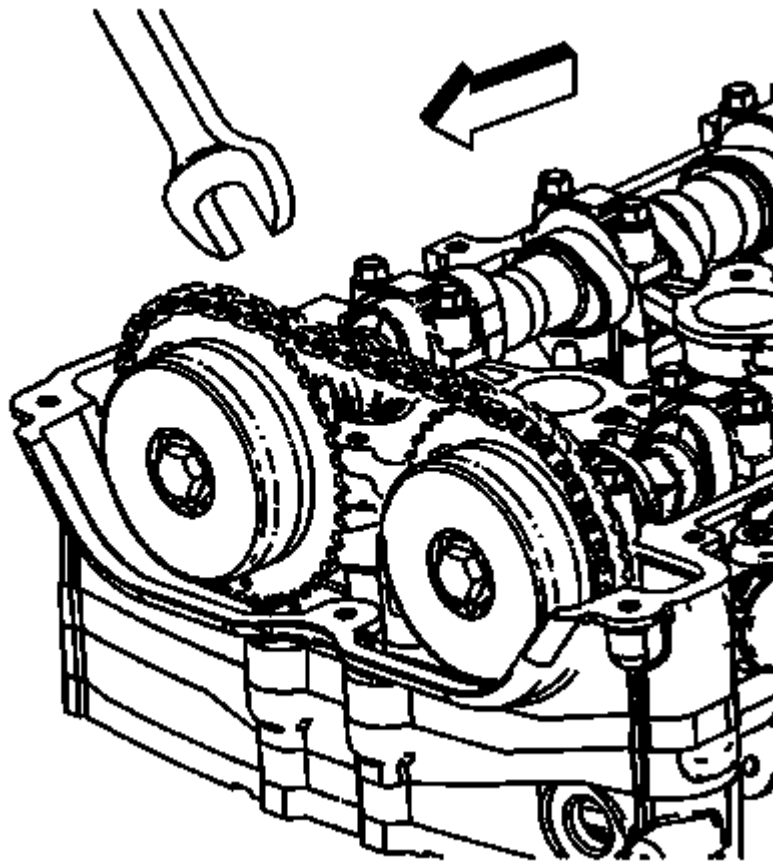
Identifying Cam Actuator, Camshaft & Chain
